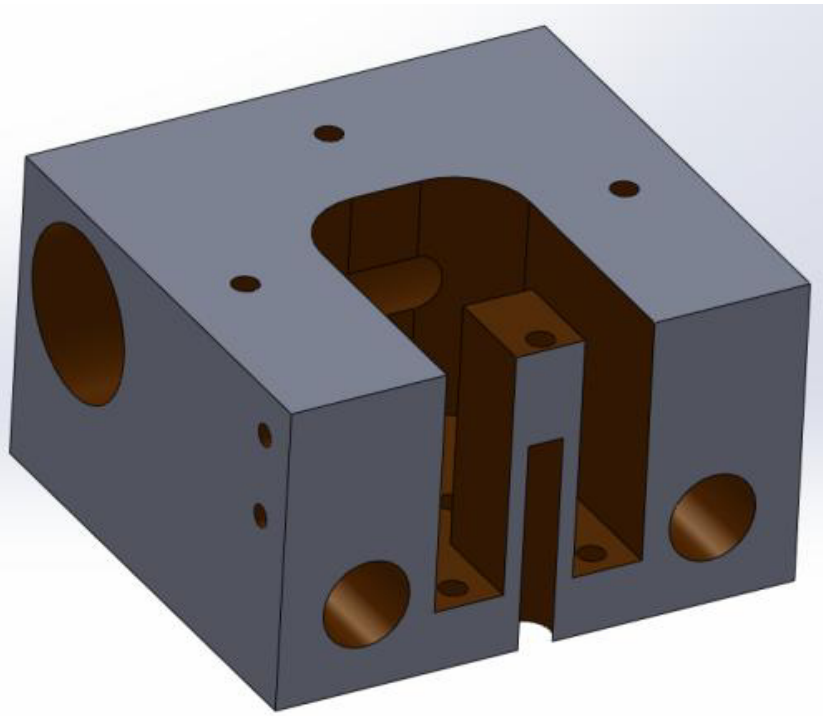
'Endplate v1.1'. This is where the moving motor attaches onto. Also includes homing switch mounting.
